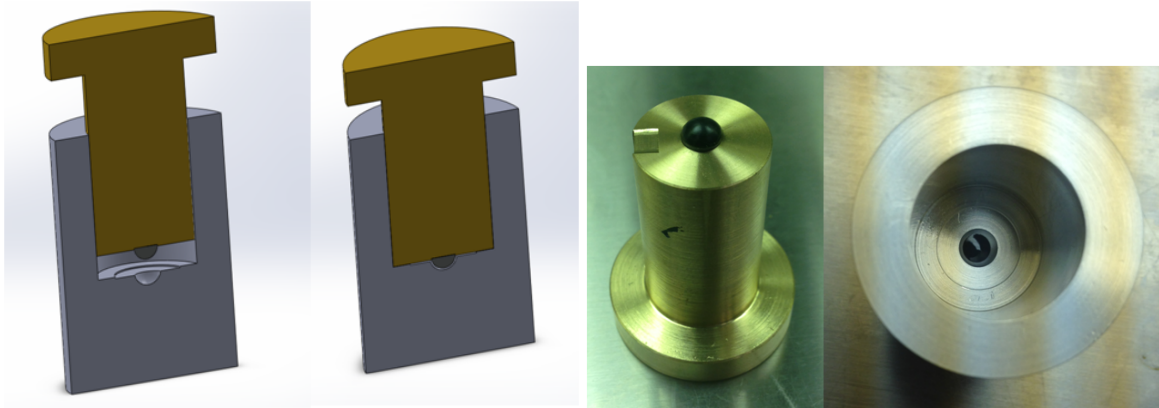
(left) CAD drawing of cross section of a piston and a mold. (right) Photograph of piston with a coated lenslet. Photograph of cavity with small drop of epoxy inside. Courtesy of Praween Siritanasak
